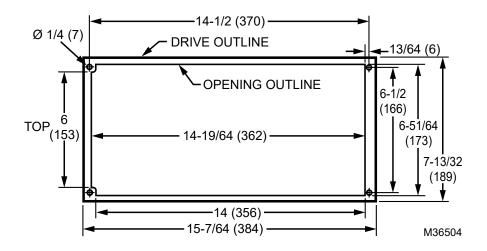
Flange mounting cutout dimensions for MI4 [Unit: inches (mm)]
